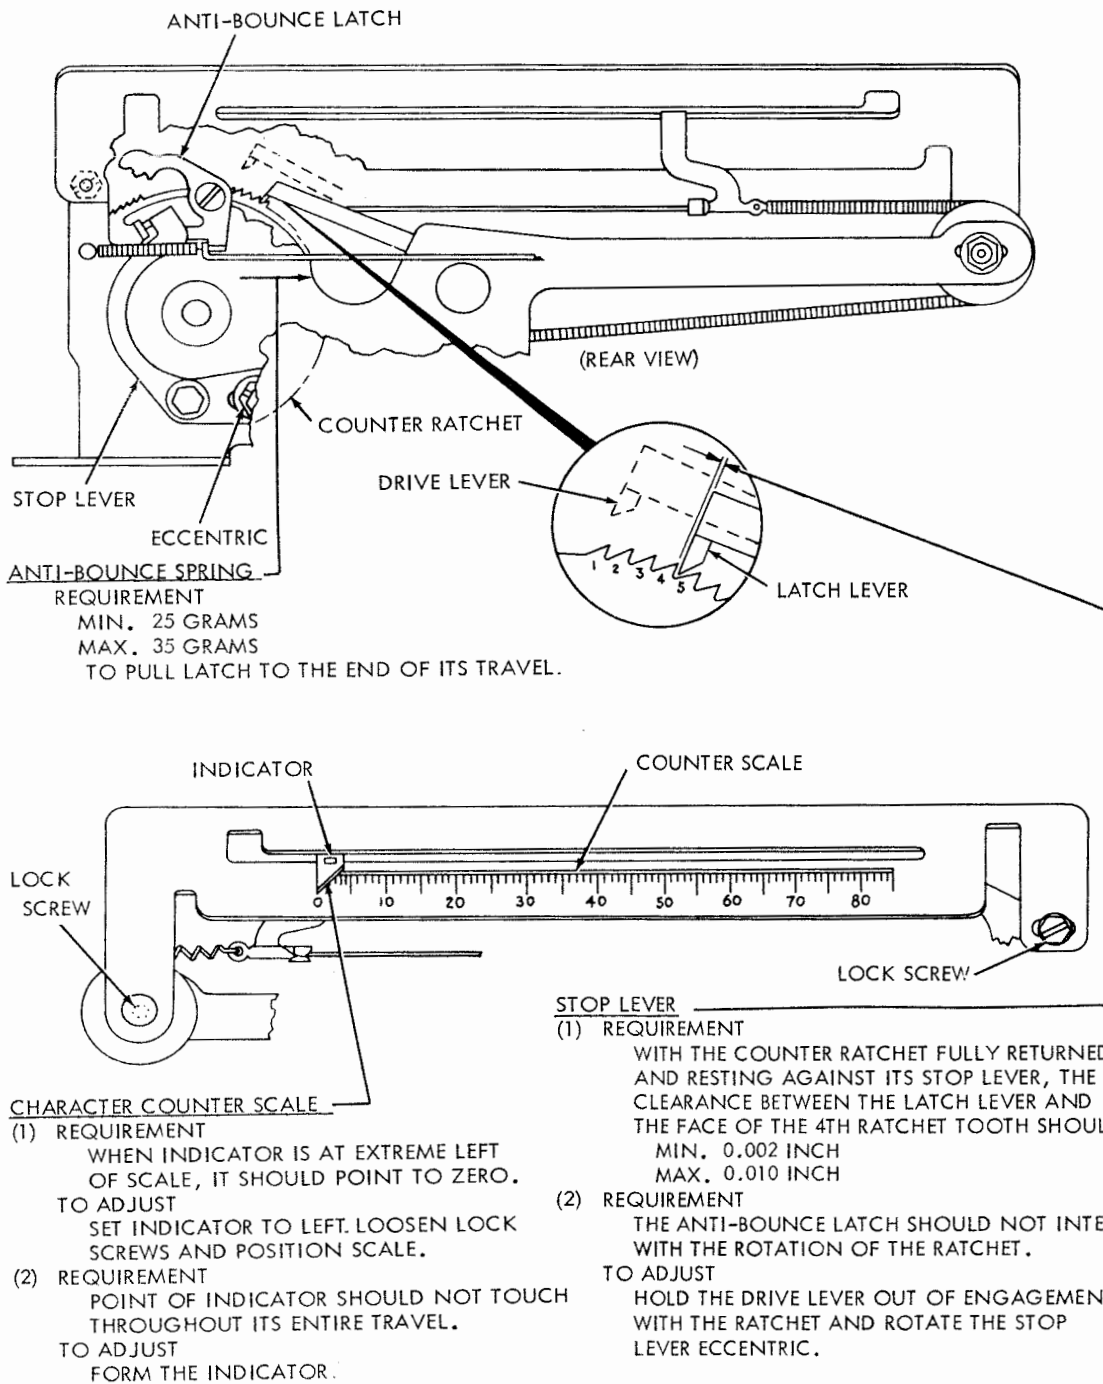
M. KEYBOARD TT-371/UG, CHARACTER COUNTER MECHANISM
